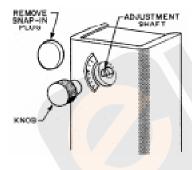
Drawing showing snapin plug removed and the knob in line to assemble. Press the knob onto the slotted shaft.
